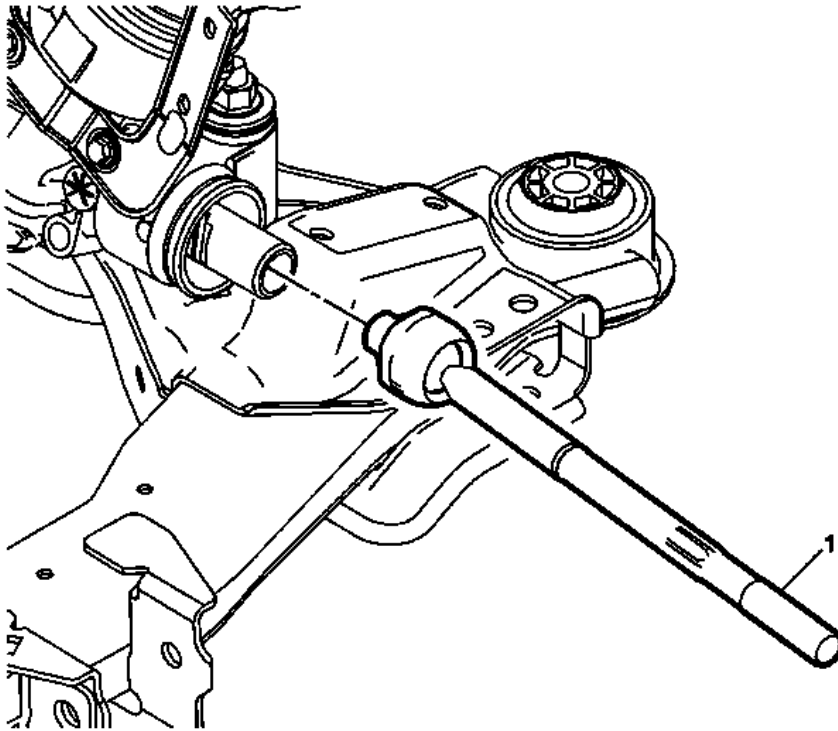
Steering Linkage Inner Tie Rod (NJ2)
